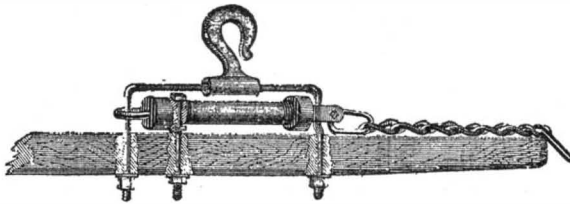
SMALLEY'S DRAUGHT TUG SPRINGS.
